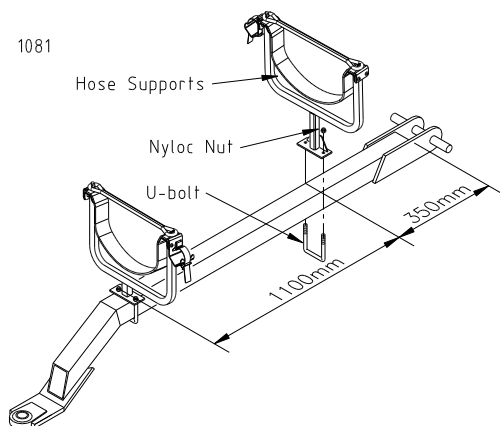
Draw Bar Assembly to suit 1830/1850 RT.
